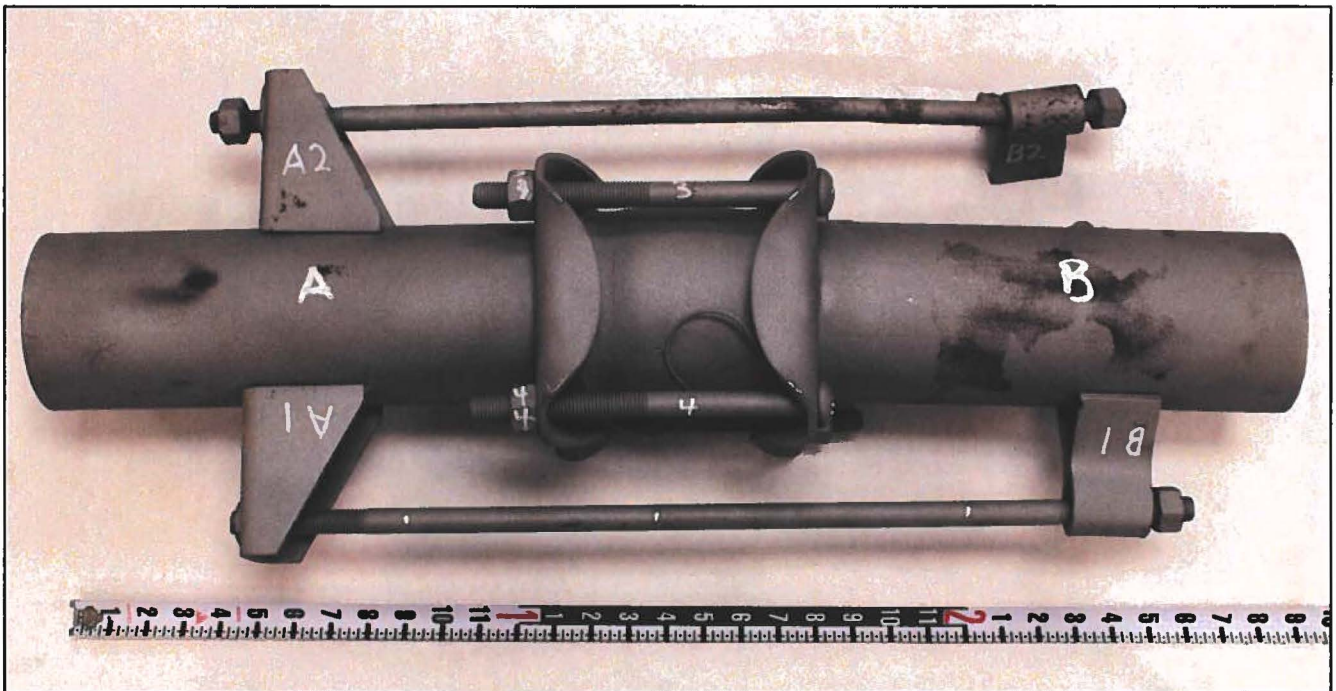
Photograph of the bottom of the submitted coupling. Lug and rod identifications are shown.
